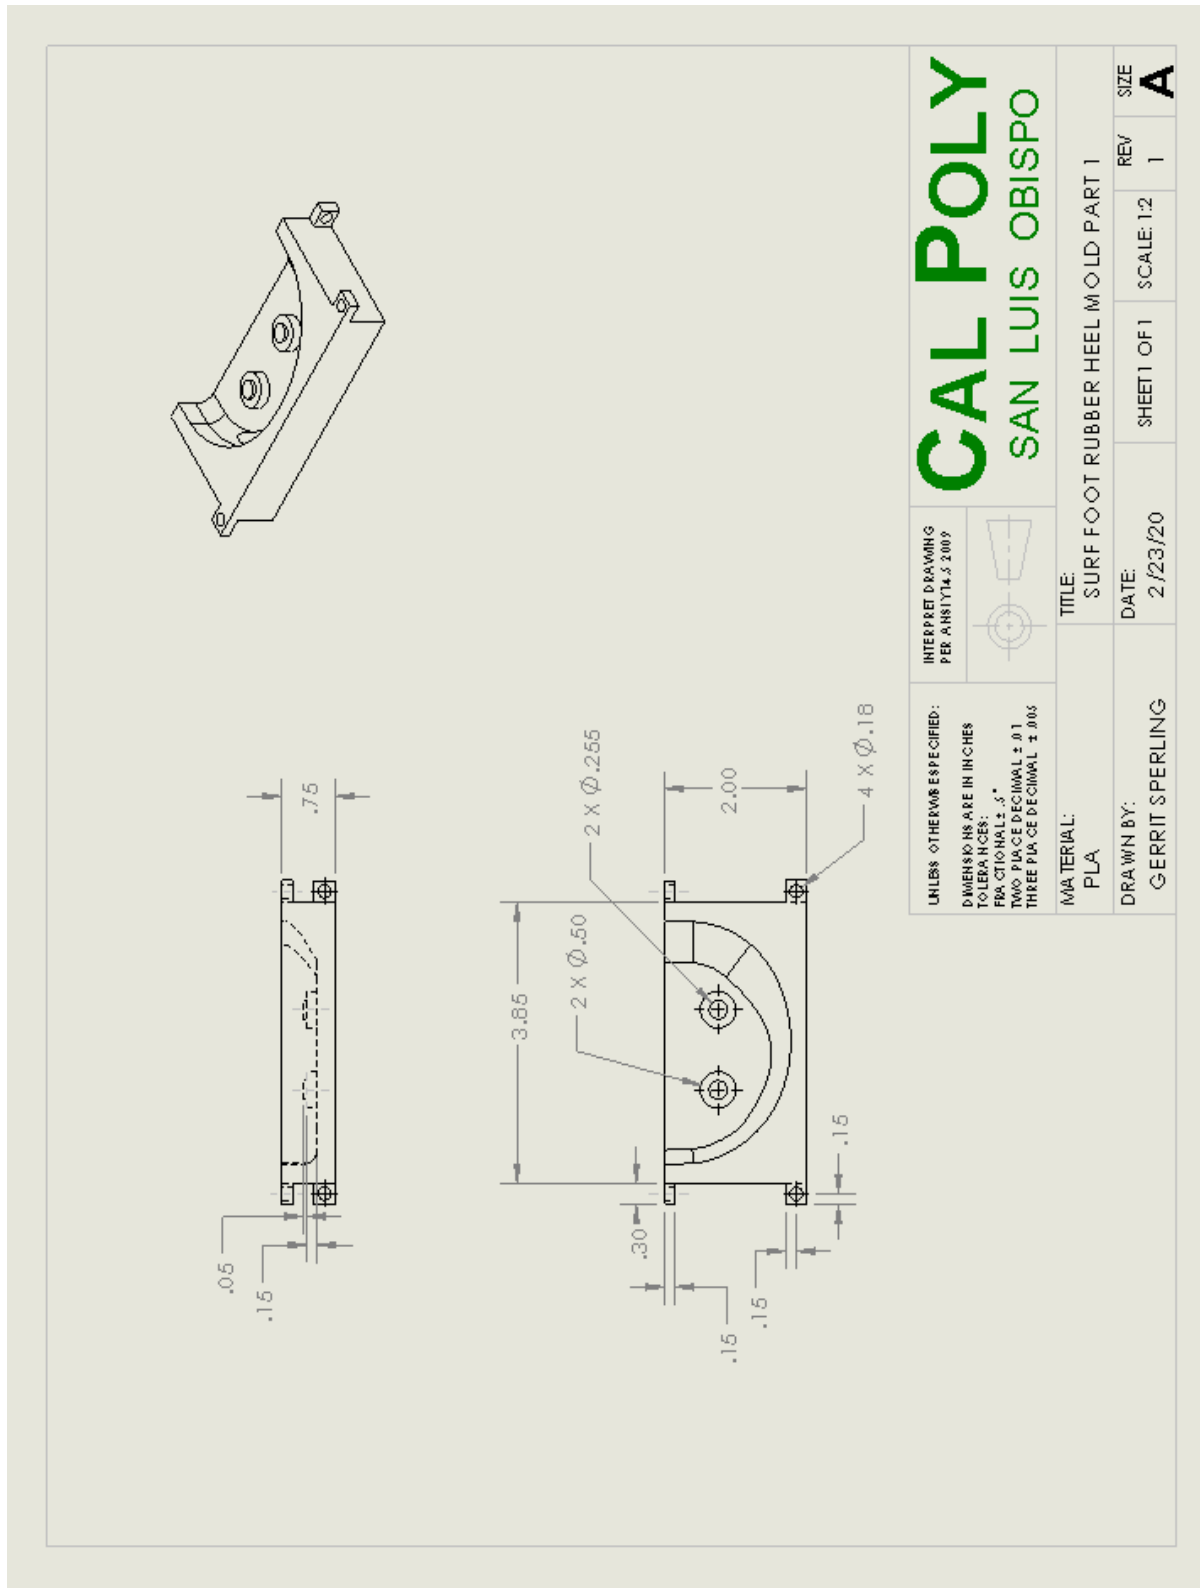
Detailed Drawing of Bottom Outer Mold for Rubber Heel
